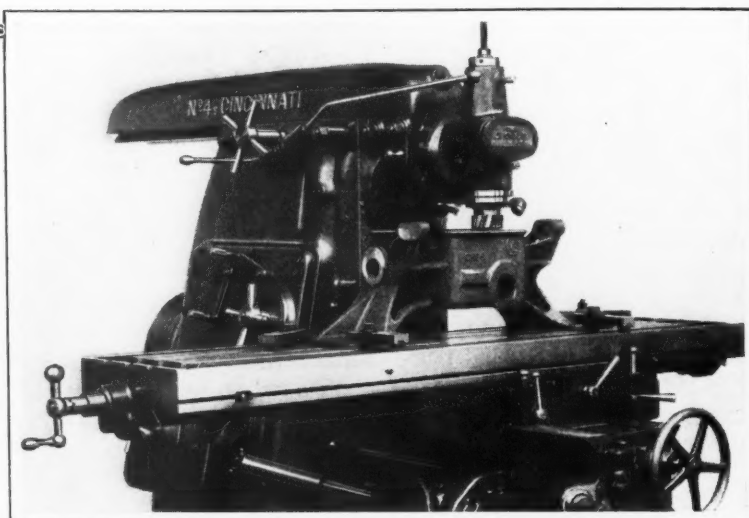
Machining a Hoist Housing on a Standard Milling Machine Equipped with a Special Vertical-spindle Attachment
